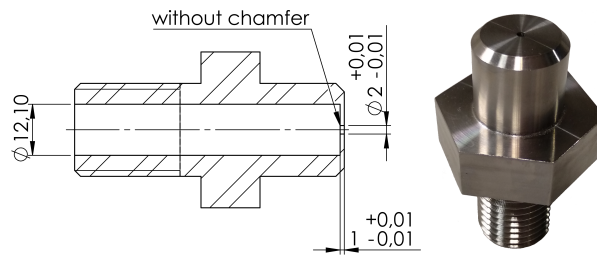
Drawings and picture of the tested nozzle. Units in mm.
